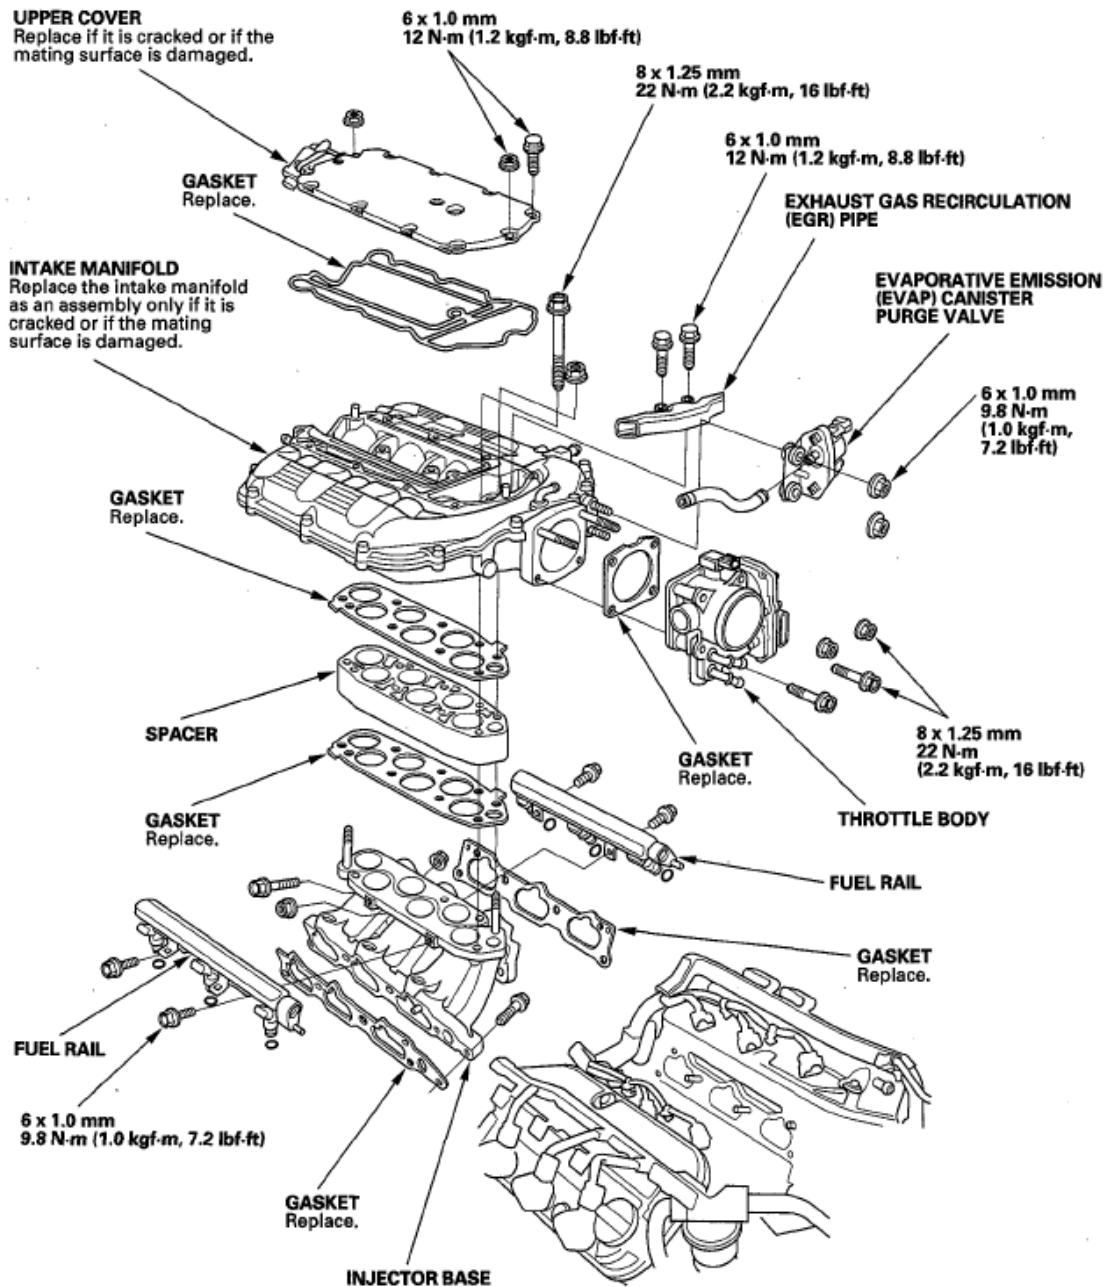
Exploded View Of Intake Manifold With Torque Specifications
